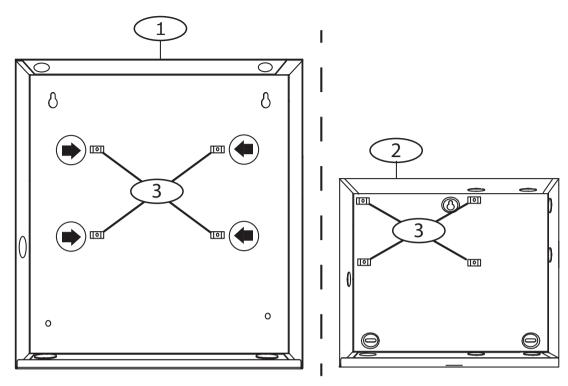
B10 and B11 mounting, wiring, and control panel placement locations
